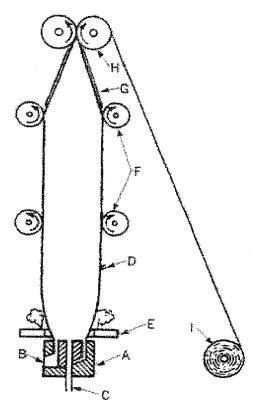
Extrusion of blown film: A, blown-film die; B, die inlet; C, air hole and valve; D, plastic tube (bubble); E, air ring for cooling; F, guide rolls; G, collapsing frame; H, pull rolls; and I, windup roll (20).
